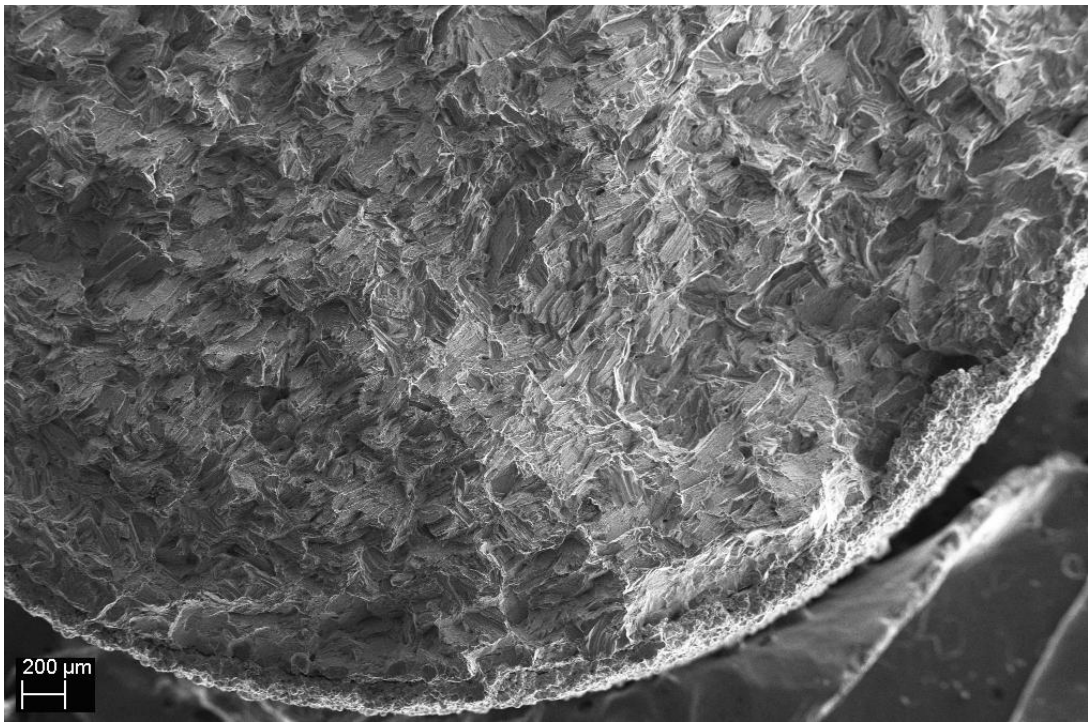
a), b)- Fracture Surface of Stress Relieved Specimen with the Nominal Stress of 188 MPa
